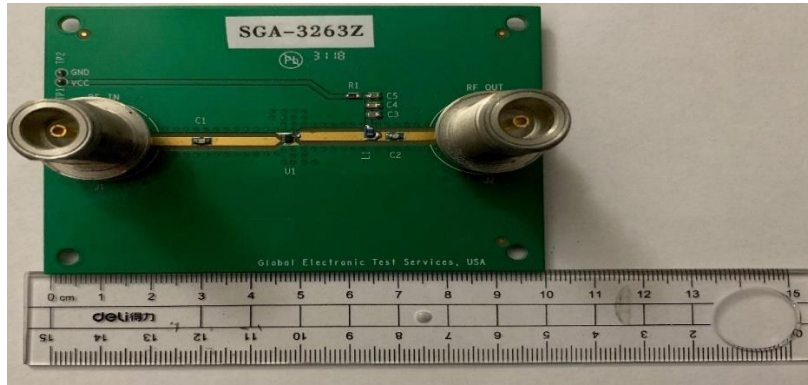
Fabricated PCB of SGA 3263Z from Global ETS, LLC.
